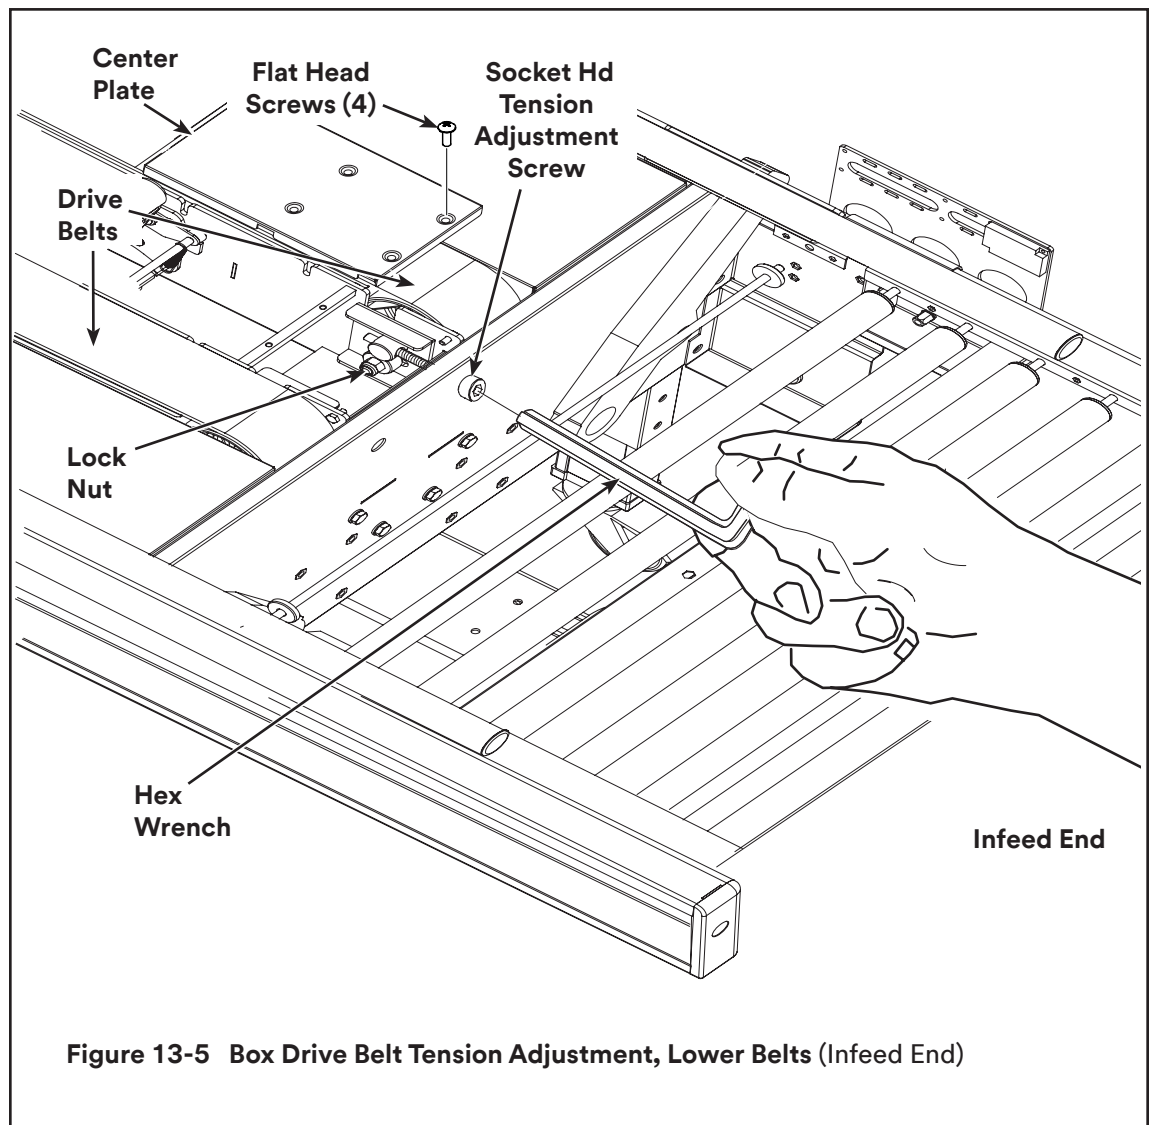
Box Drive Belt Tension Adjustment, Lower Belts (Infeed End)
